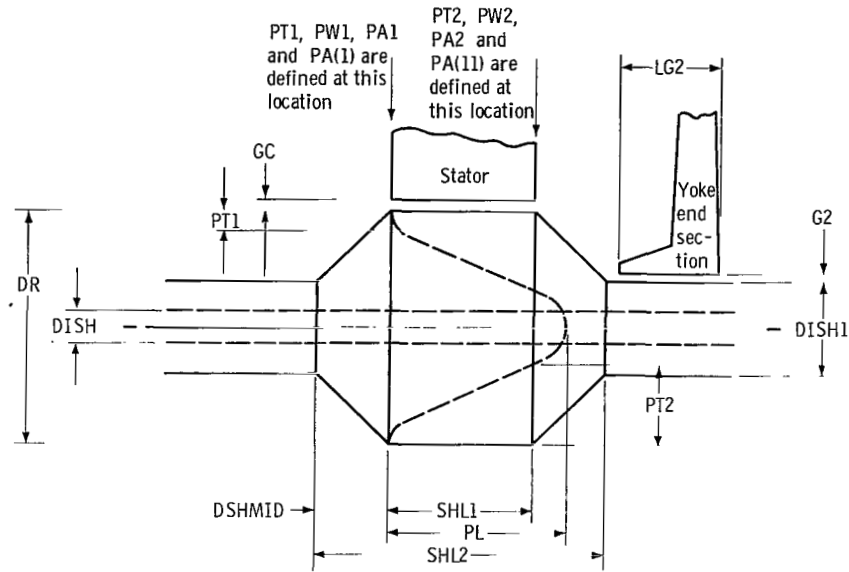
Dimensions associated with rotor, main and auxiliary air gaps.
